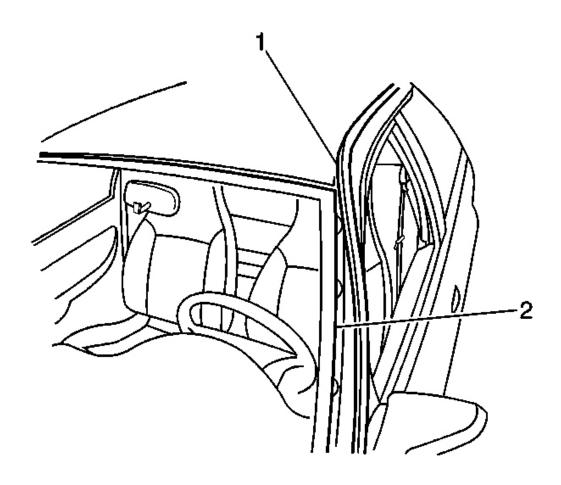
View Of Front Door Sealing Weatherstrip Courtesy of GENERAL MOTORS CORP.
